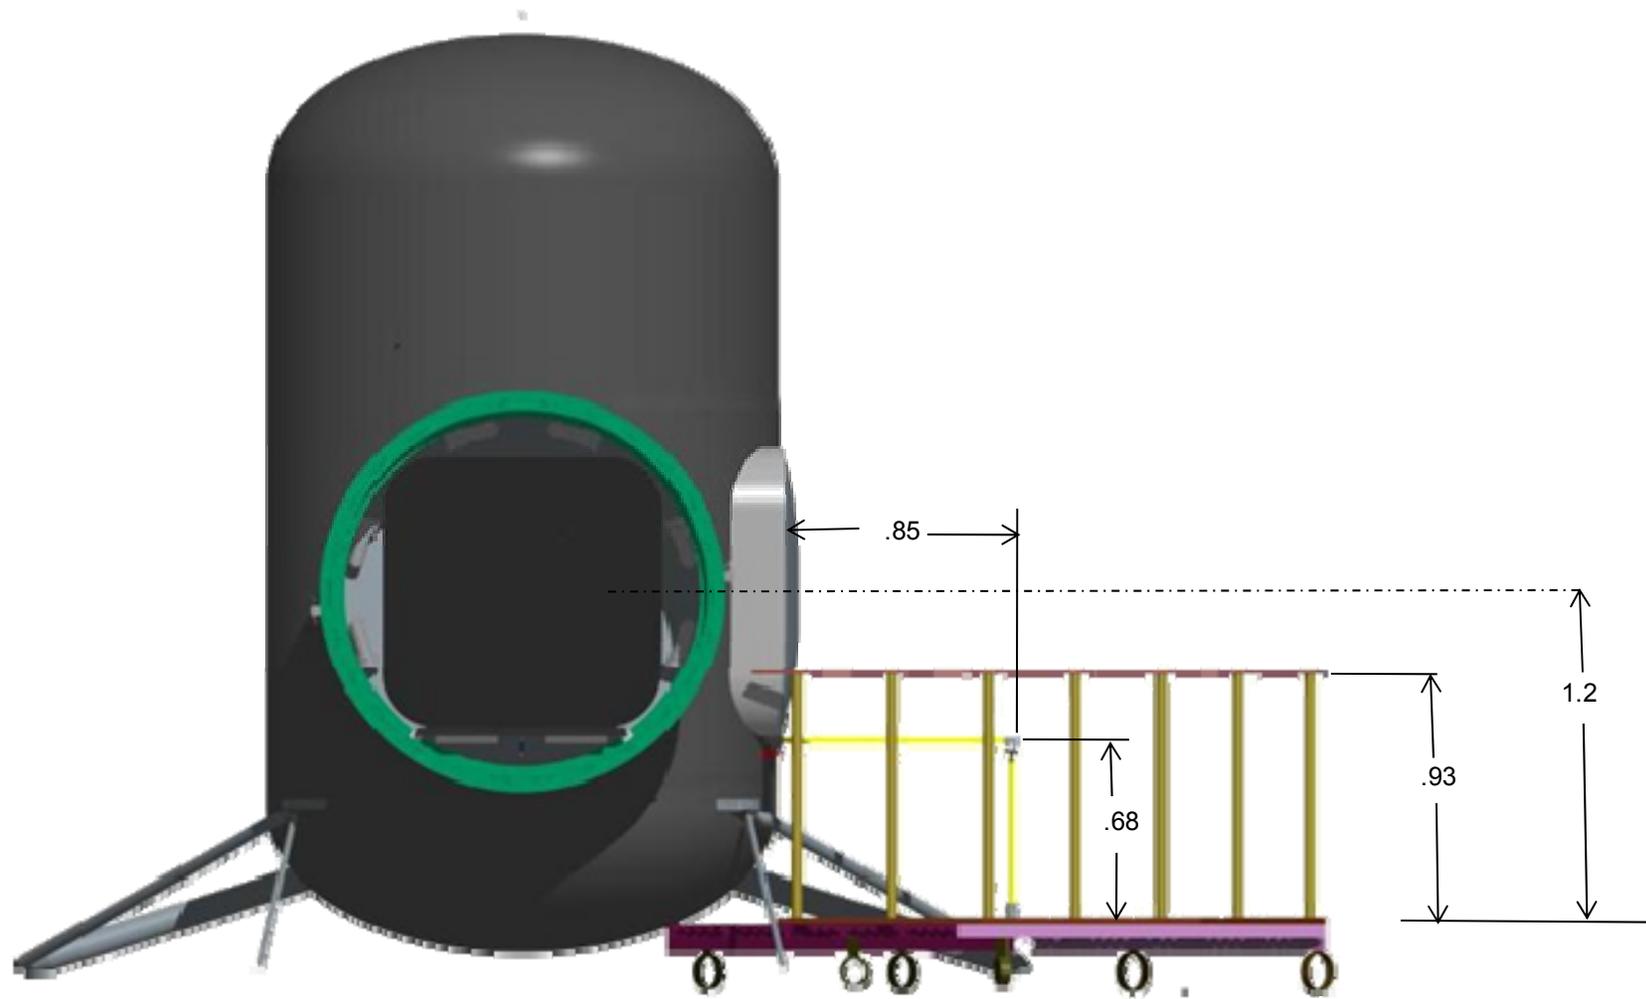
Side view showing porch dimensions used for mock-up fabrication (dimensions in meters).
